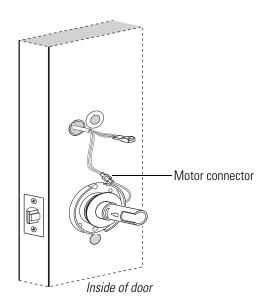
Disconnecting the motor connector (B.A.S.I.S. Lock shown)
